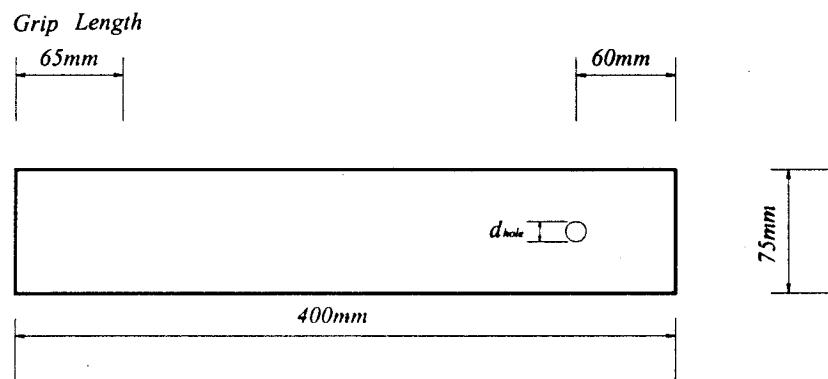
Dimensions Of Test 091-230-1/4-SS-A
